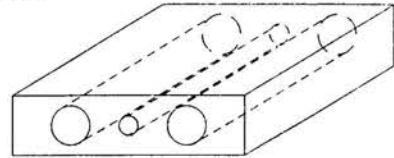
Modified Aluminum Spreader Plate. Overall dimensions are 3"x 3"x 1/4" thick with one 1/4" diameter hole and 2 1/2" diameter hole. Volume of PCM = 2.17x10⁻⁶ m³ and VF = 0.20.
